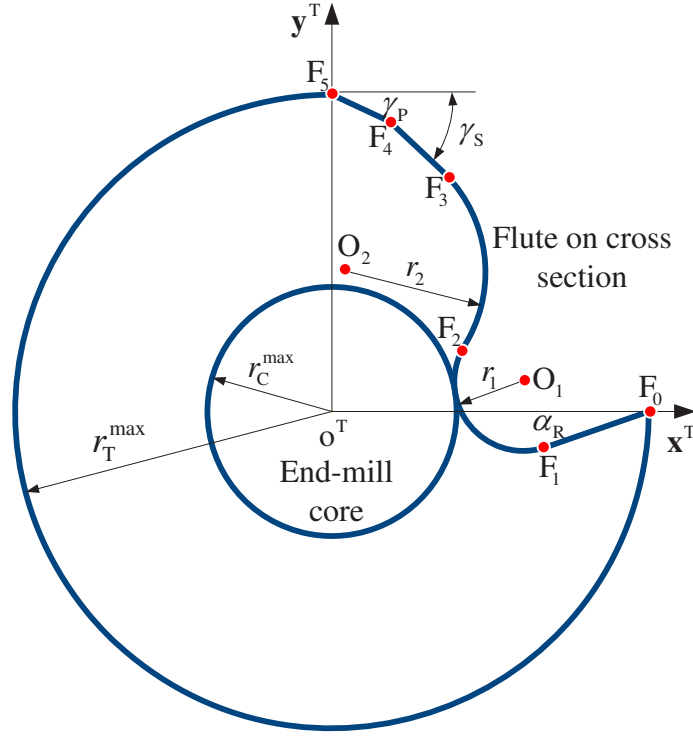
A general flute design of a four flute end-mill on the tool coordinate system.
